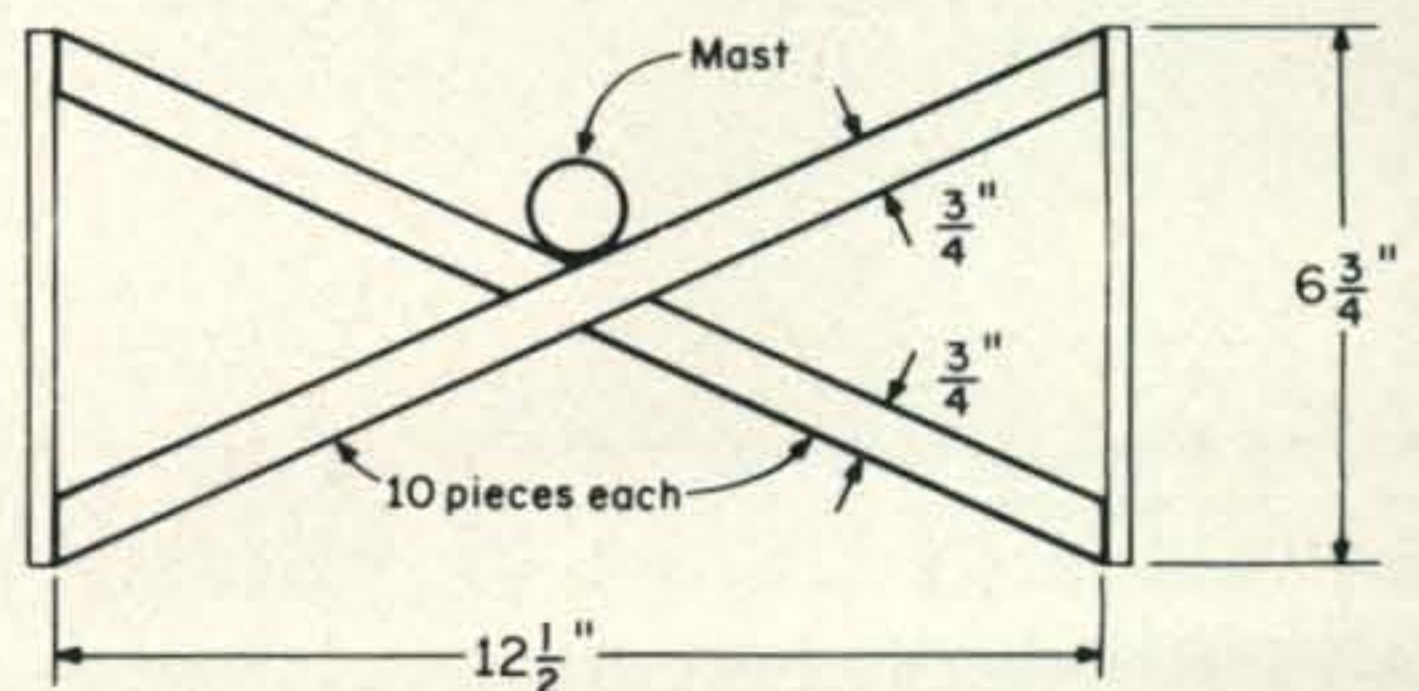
Top view of the hub showing the dimensions and angles that must be cut.
